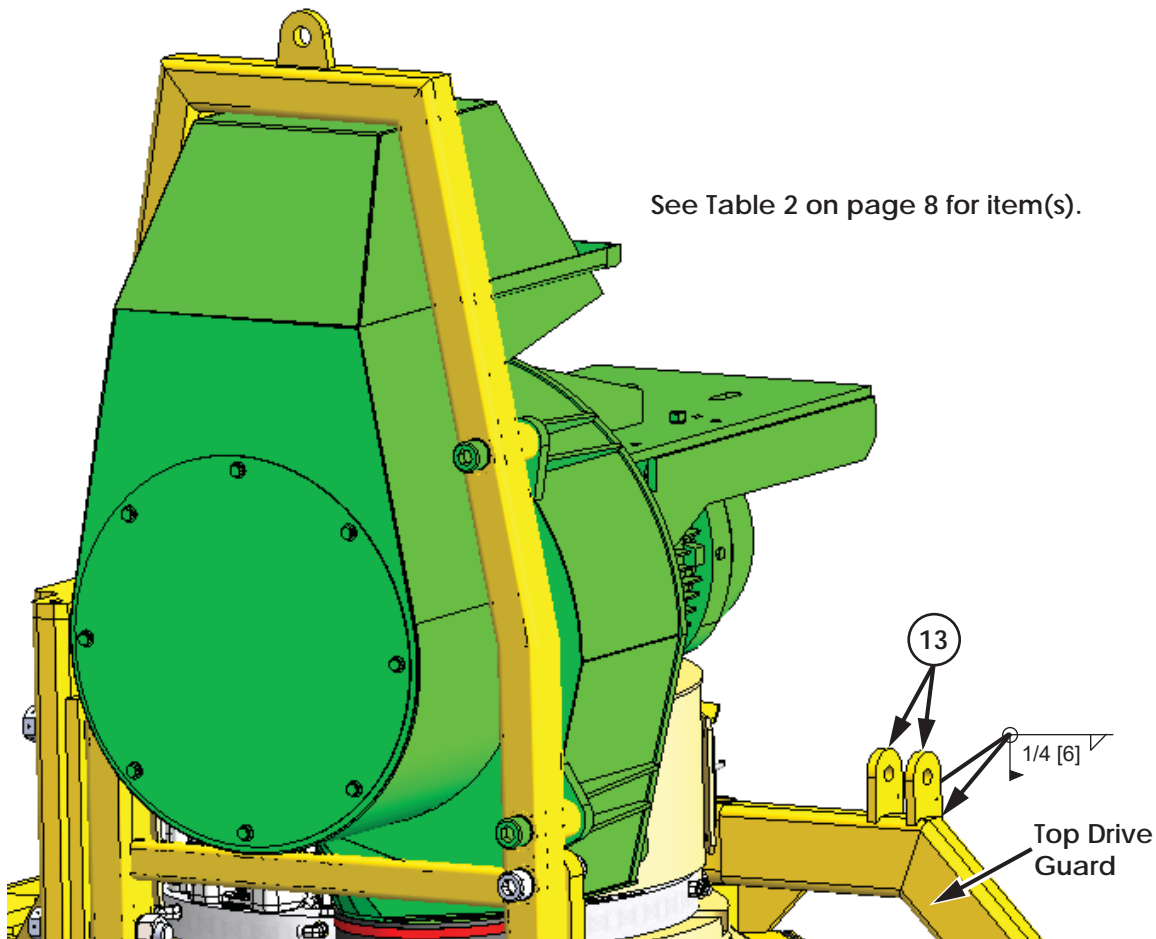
Welding pad eyes – item 13 (2 each) – to Top Drive Guard
